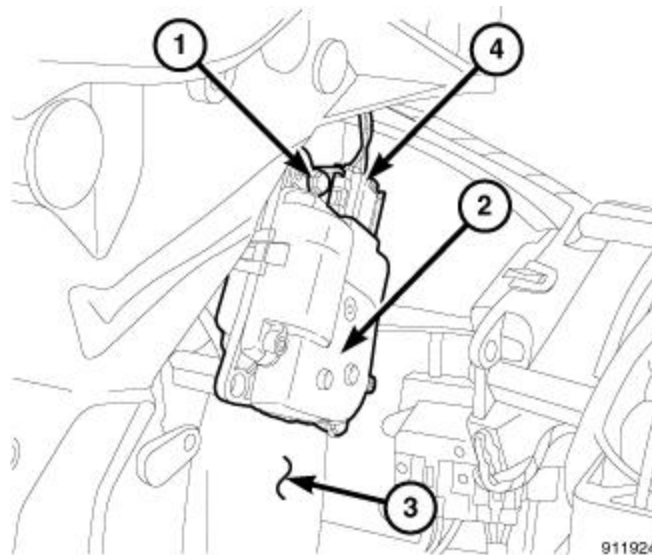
Blend Door Actuator, Distribution Housing, Wire Harness Connector & Screws
